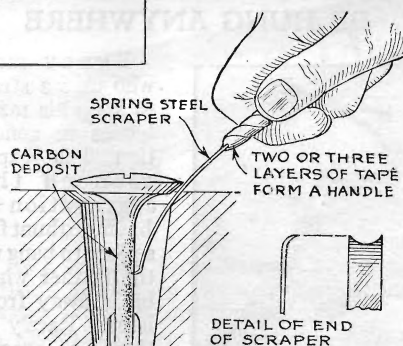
A piece of bent clock spring can be used to remove carbon with valves in place
